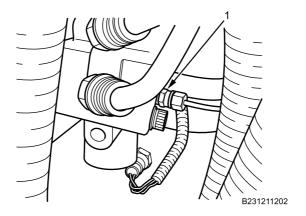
Pressure Test Kit (ZTSE4409) Adapter.
